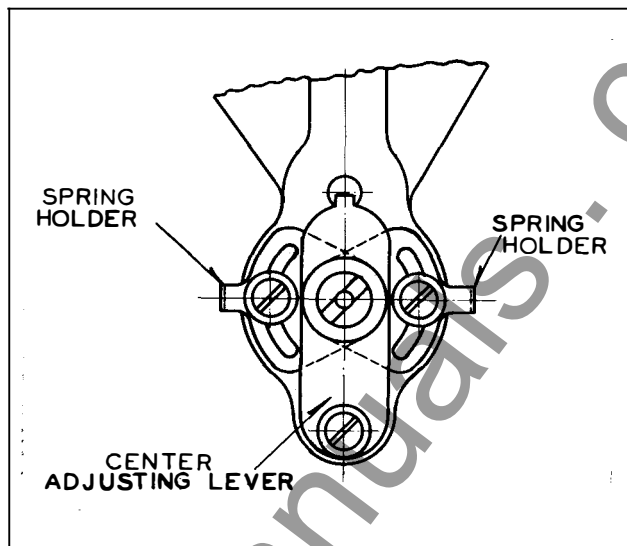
Detail of the Spring Holders and Center Adjusting Lever.
